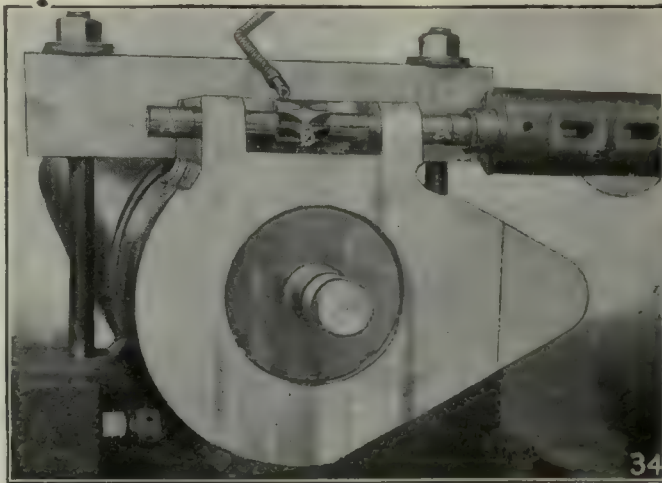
RADIUS-MILLING BACK CORNER OF HINGE POCKET
